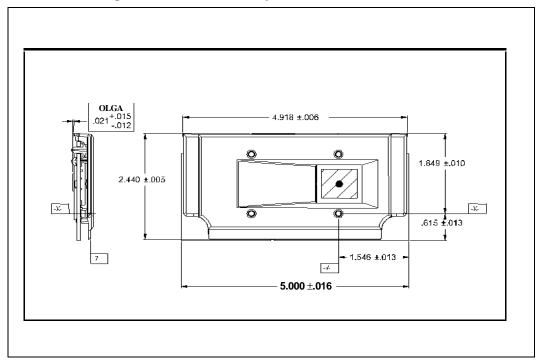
S.E.C.C.2 Packaged Processor Assembly — Primary View
